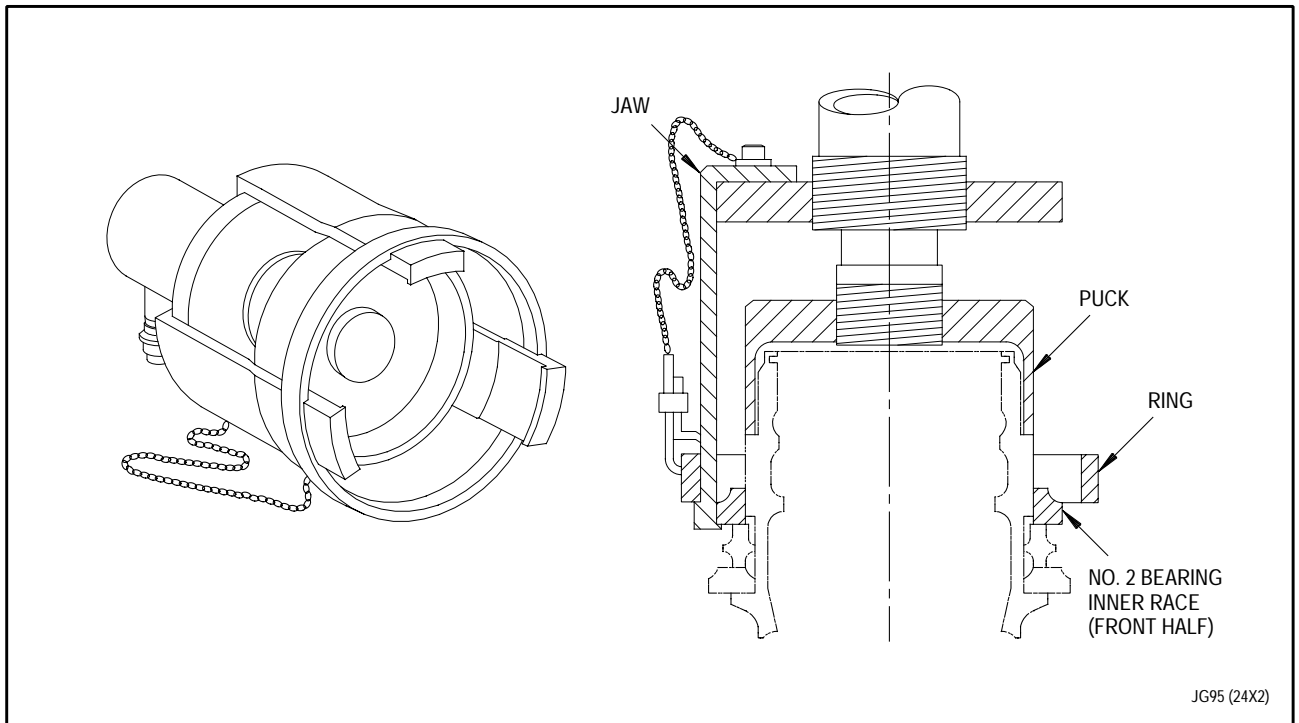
No. 2 Bearing Inner Race (Front Half) - Removal With PWA 50606 Puller
